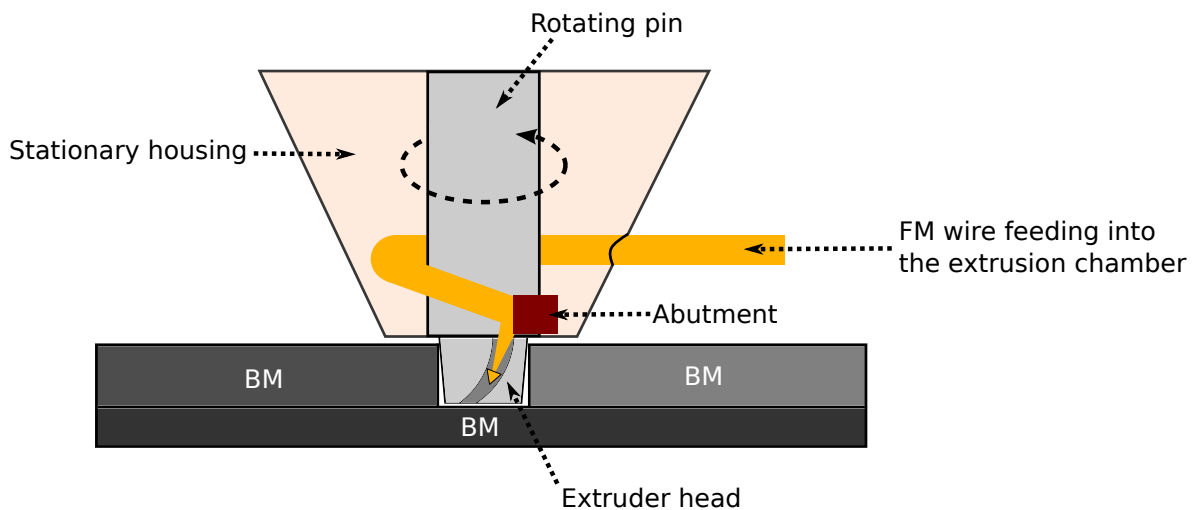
Simplified illustration of a HYB process where three base metals (BM) are being joined together. The extruder head built around a rotating pin slides along the groove between the BMs. The filler metal (FM) wire gets fed into the extrusion chamber and flows against the abutment, which results in extrusion of the plasticized FM into the groove.
